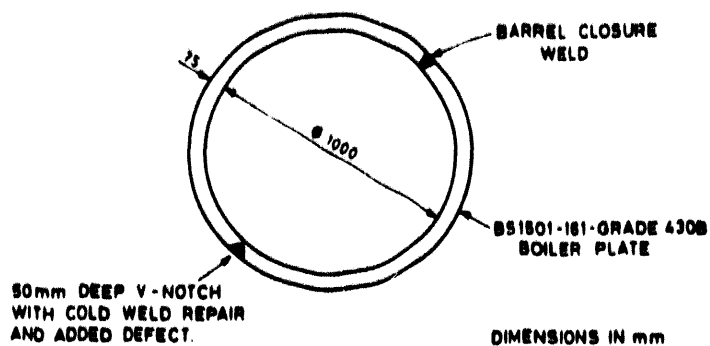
THE COLD WELD REPAIR VESSEL
